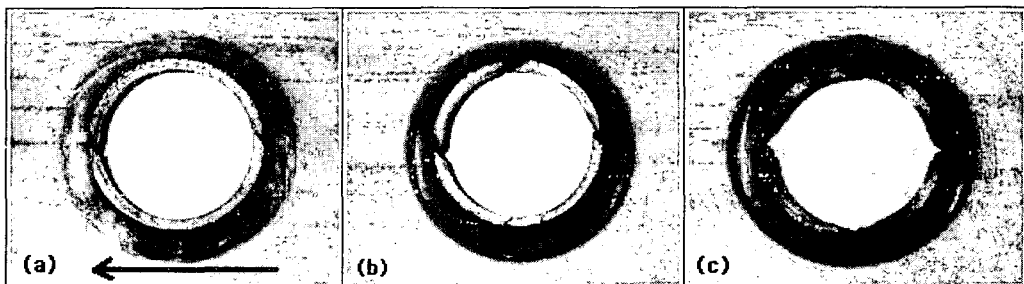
The phenomena of fracture on the rolling direction of the flange in the hole flanging process (a) 0° (b) 90° (c) four petals TIRP Steel showing start and finish of fracture with petal formation
